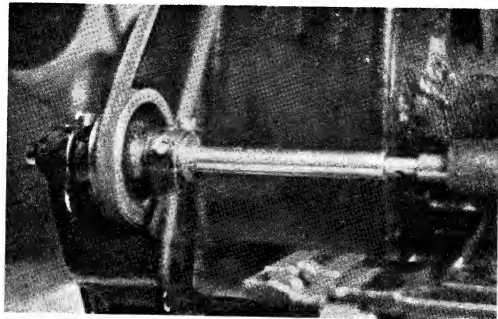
Boring the headstock bearing. The cutter of the boring bar can be seen just about to start the cut. Note small gap between pulley and left-hand bearing, as mentioned in the text
